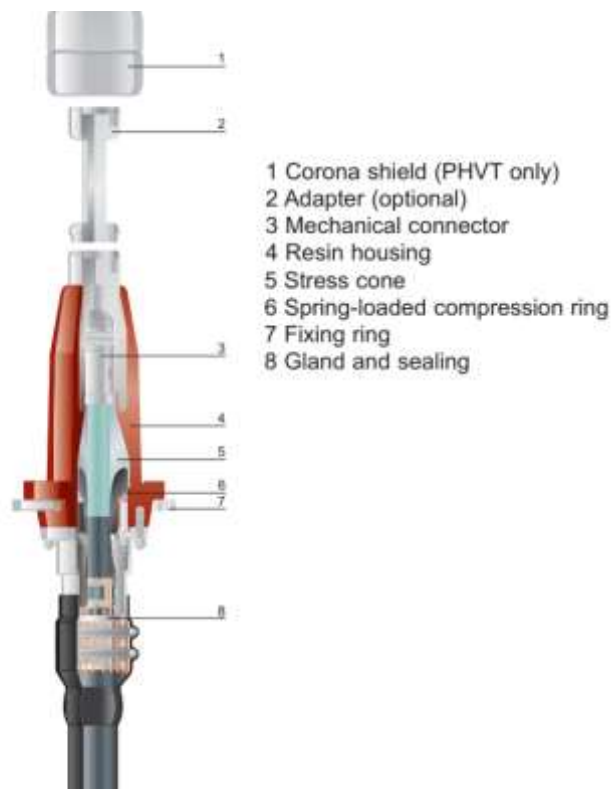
Typical 69kV dry type plug in termination for GIS switchgear
